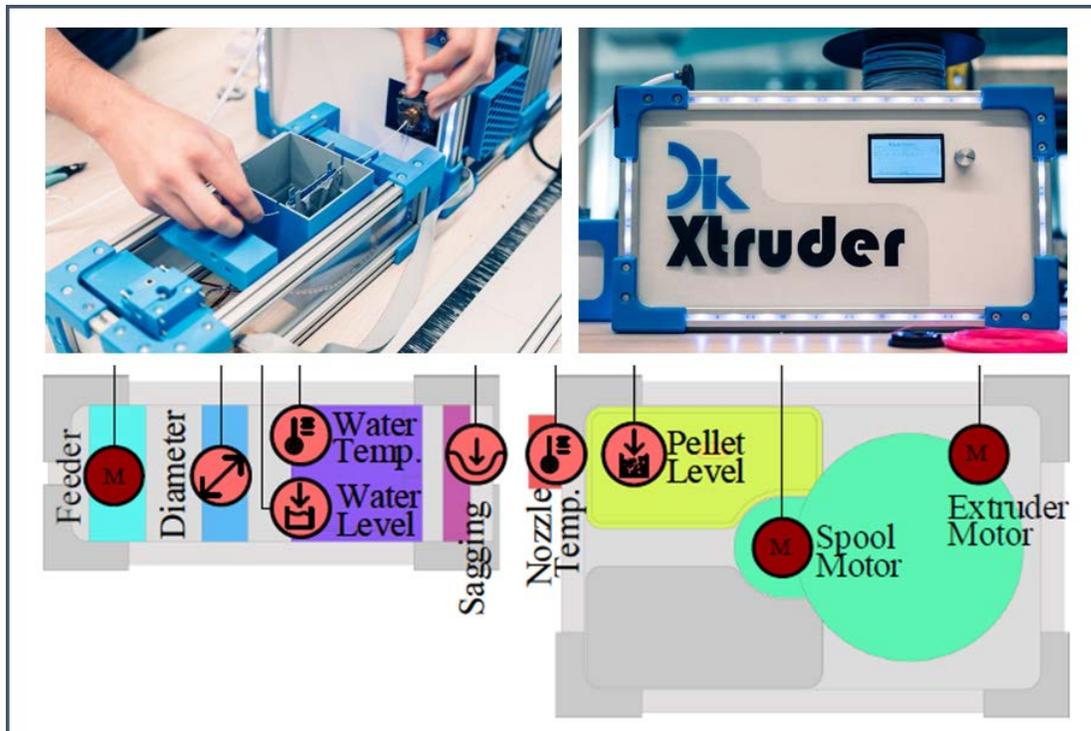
Setup and sensor layout plan for the extruder *DikXtruder
